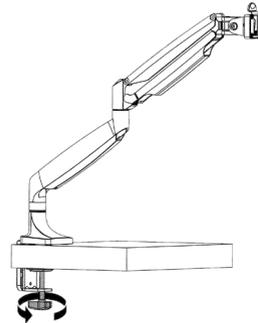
Attach clamp mechanism D to angled bracket C.
